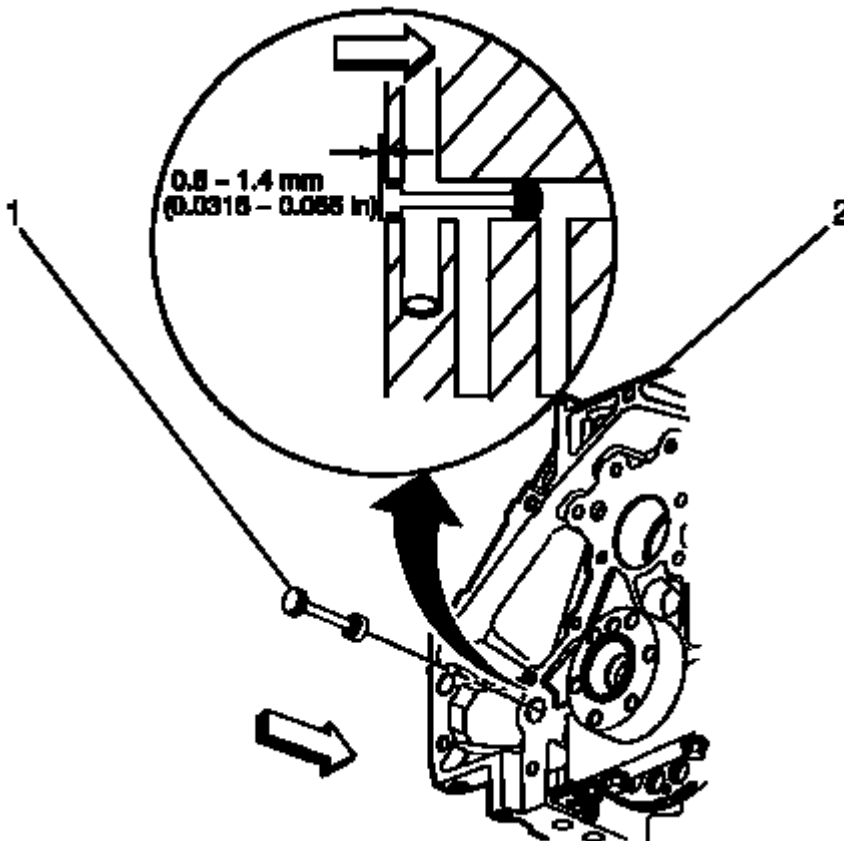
Identifying Rear Oil Gallery Plug & Engine Block
